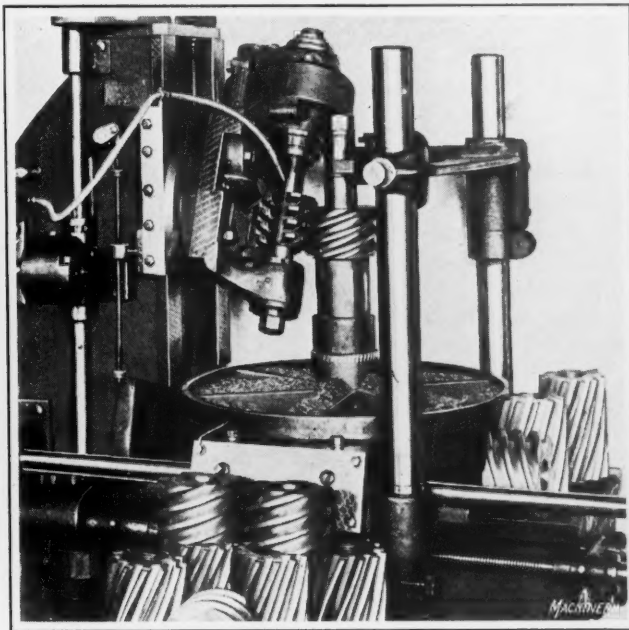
Hobbing Gears of 70-degree Helix Angle
